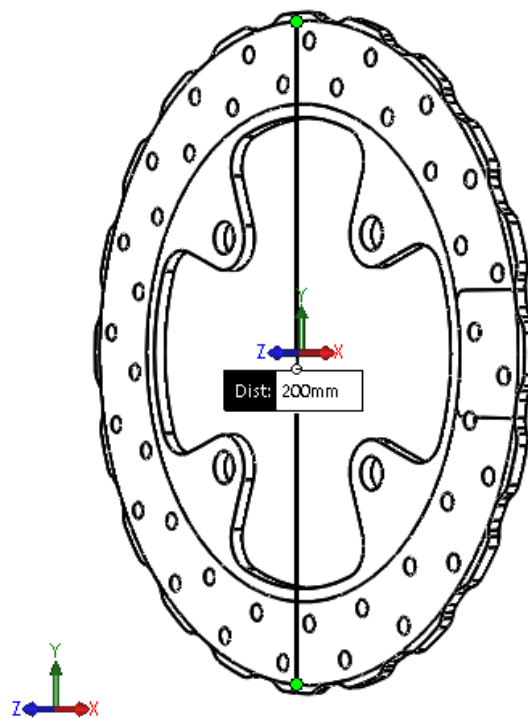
Front Rotor with section lines illustrating the region of contact with the pad.
